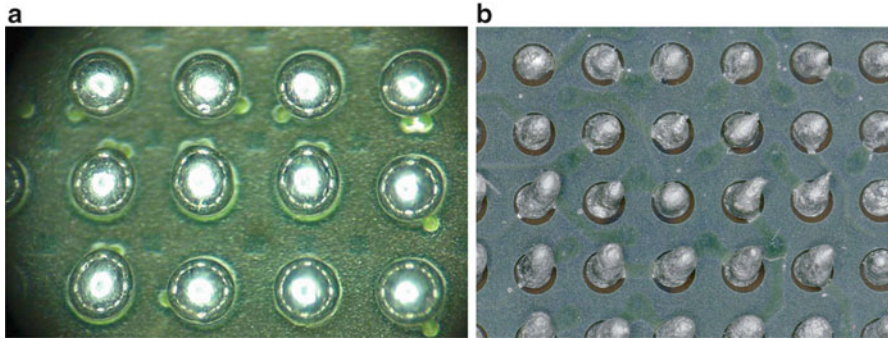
Damage or altered BGA Balls. (a) Distorted solder balls (*Source: Honeywell Inc.*); (b) Non-uniform/damaged solder balls
